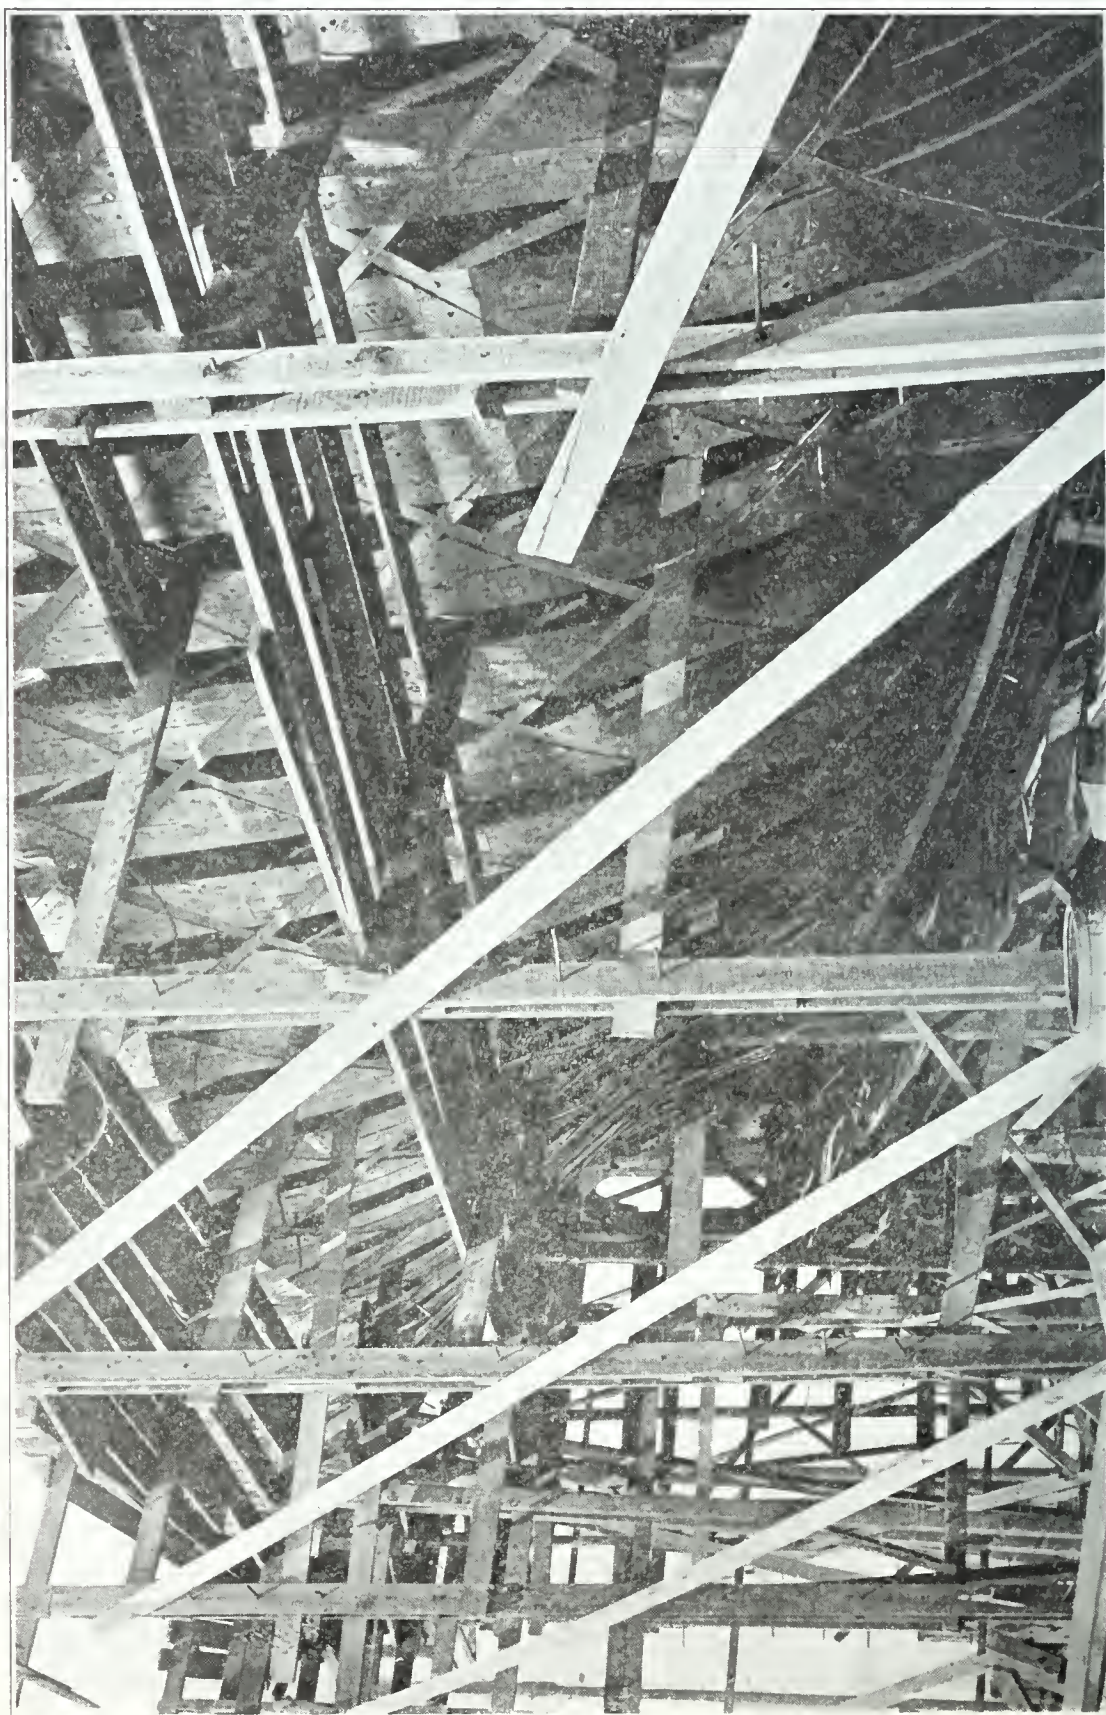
Stern showing steel strapping, planking, holes bored in frames for ceiling fastenings, and staff rings set in planking and frames.
